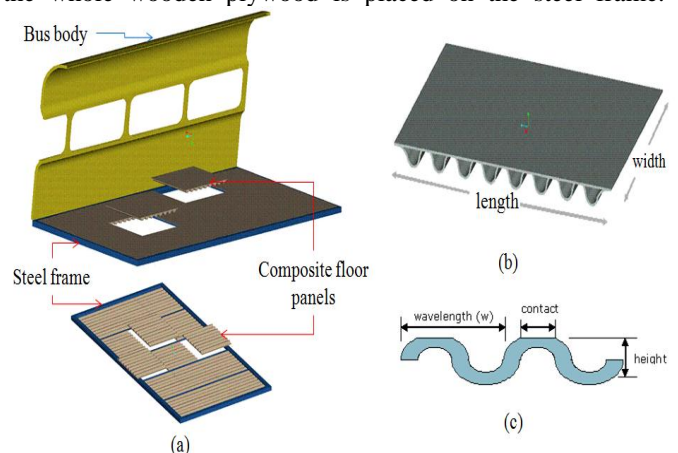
Composite Unit Cells making up Floor Structure. (a) Proposed floor structure, (b) Composite floor unit cell, and (c) Hat sine wave rib structure.
